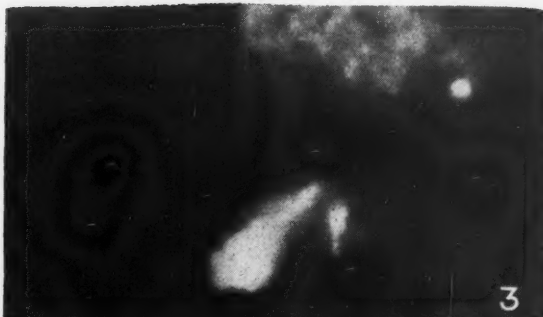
Exograph of section of steel casting showing sand inclusions around the chaplet.
